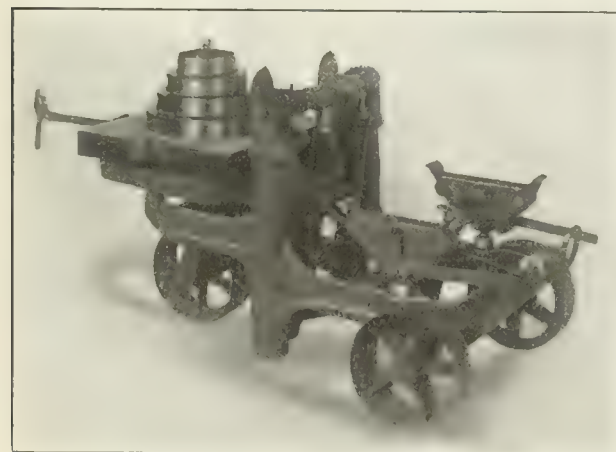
The Pattern Mounted on the Turn-Over Frame.
